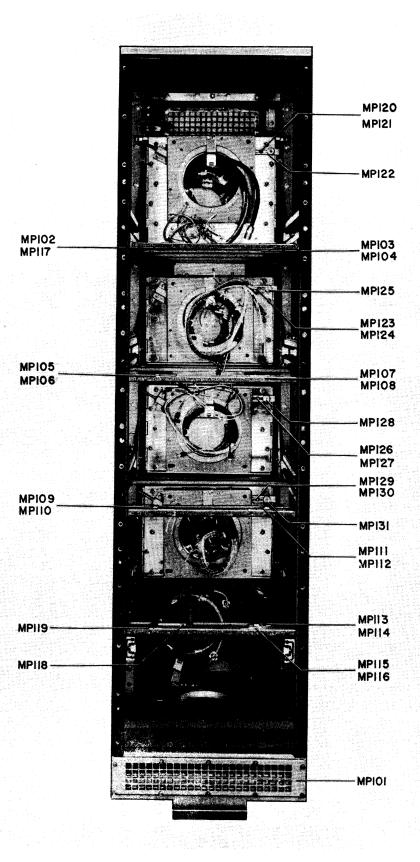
Electrical Equipment Cabinet CY-2558/WRT-2, Replaceable Mechanical Parts
